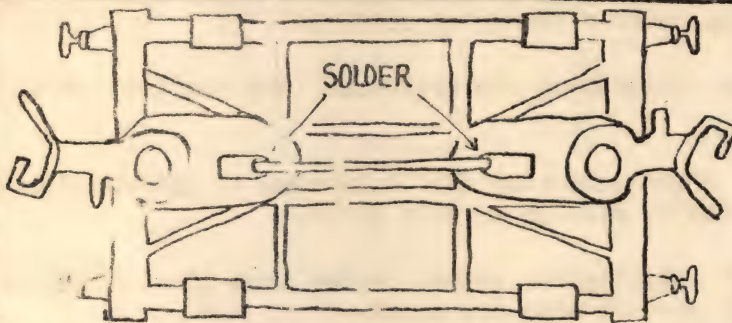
SHOWS JOB SET UP PRIOR TO SOLDERING
